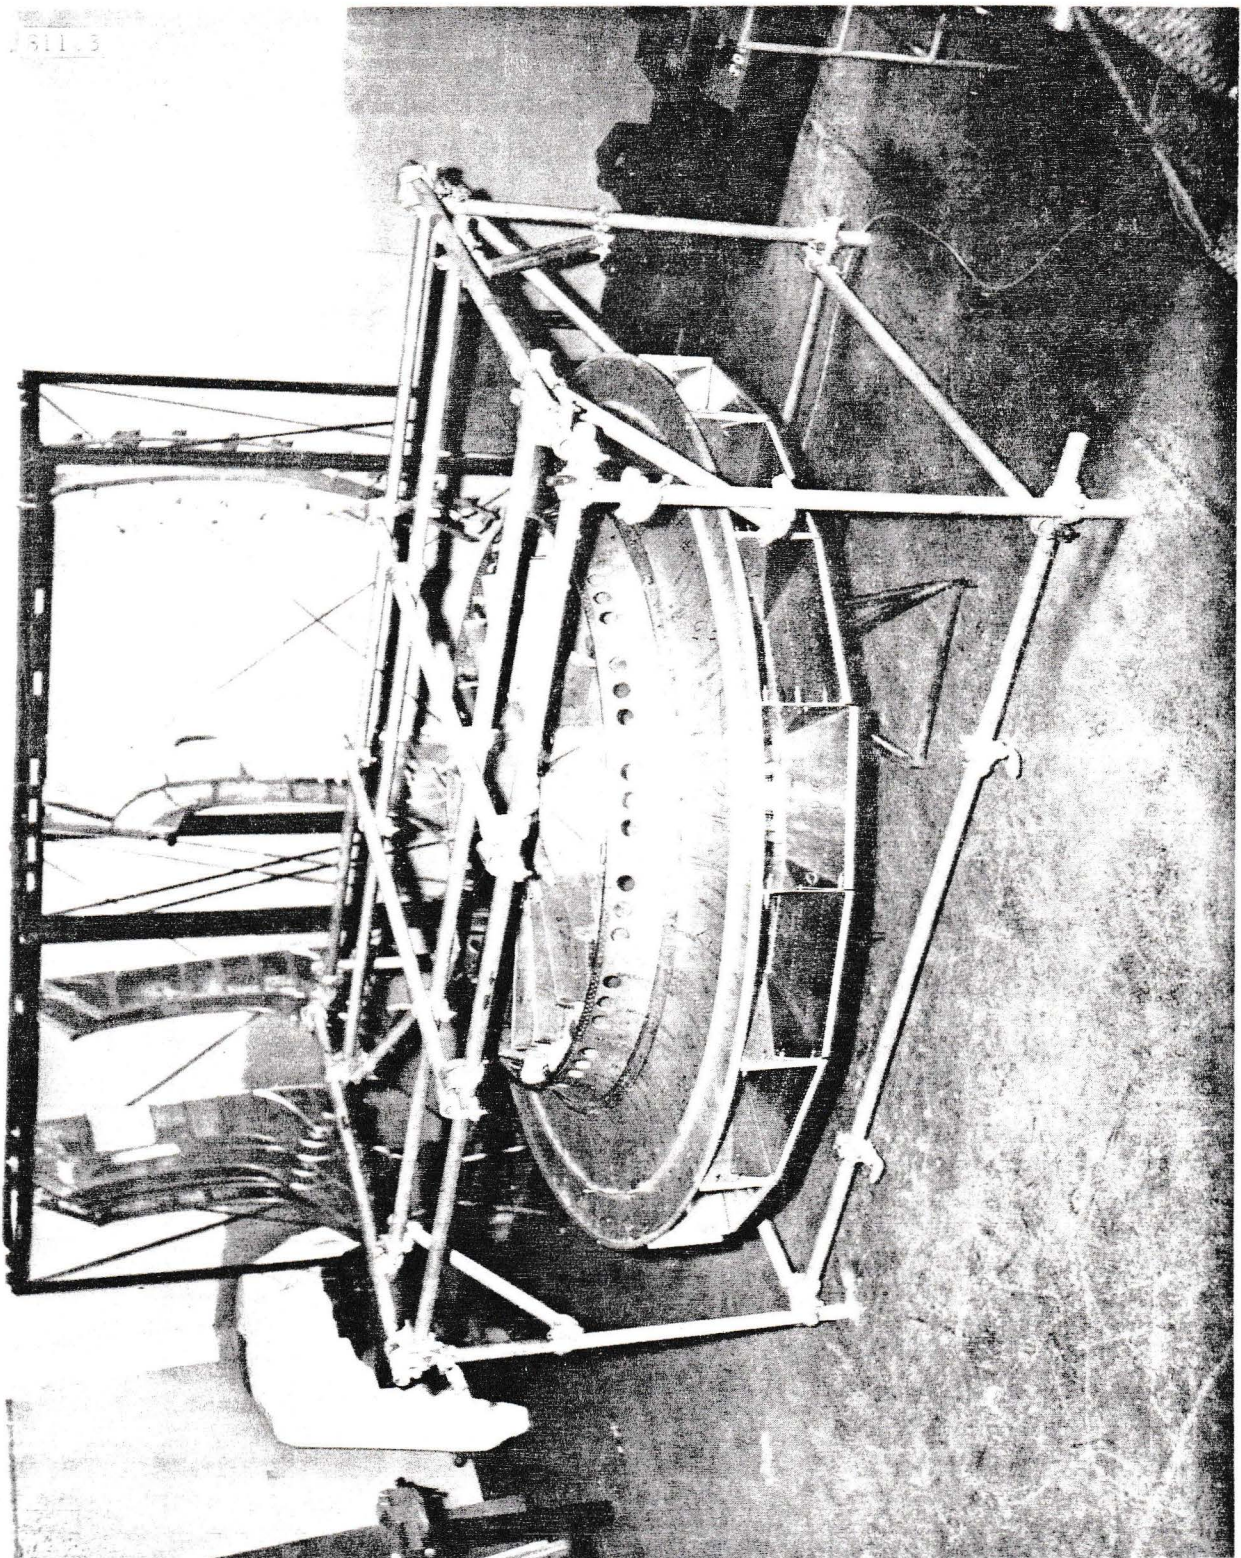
CENTRE STRUCTURE ASSEMBLY FOR ROTOR TEST RIG
